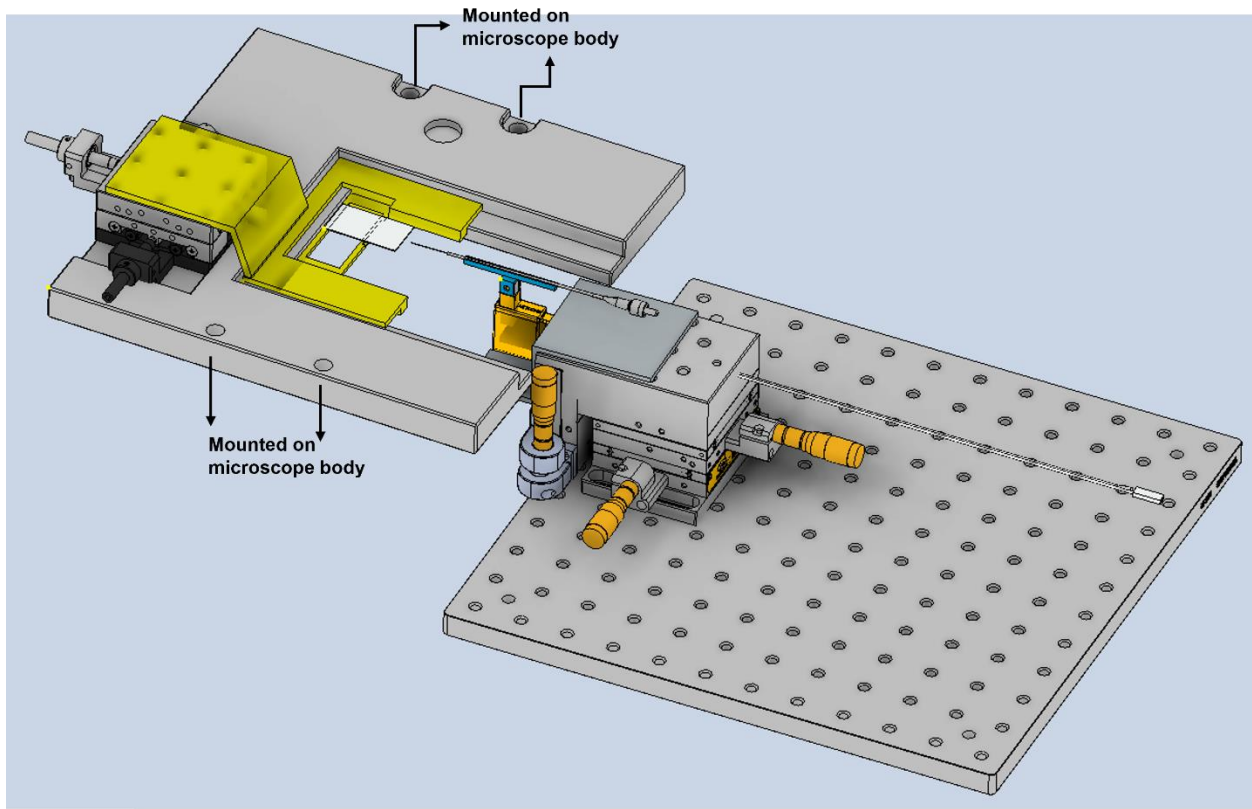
Isometric view of the stage assembly combined with lensed fiber coupling optics assembly.
